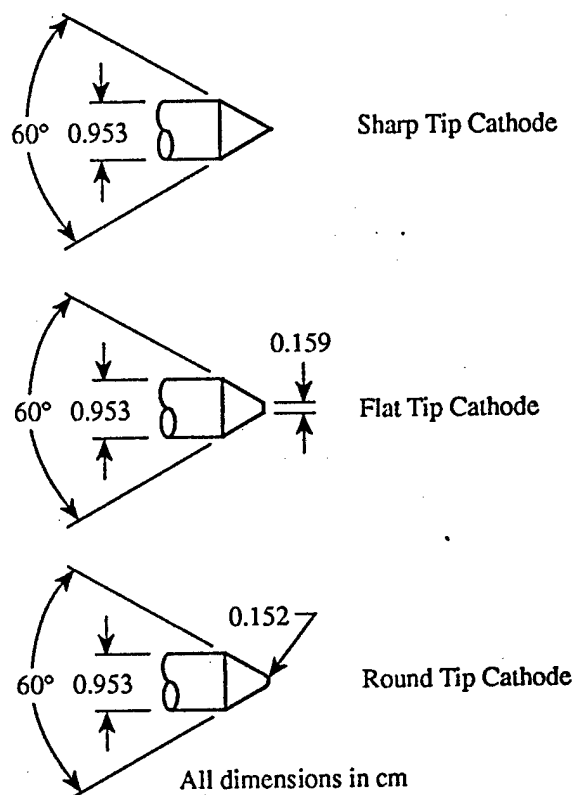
Machined cathode dimensions prior to testing (drawing not to scale).
